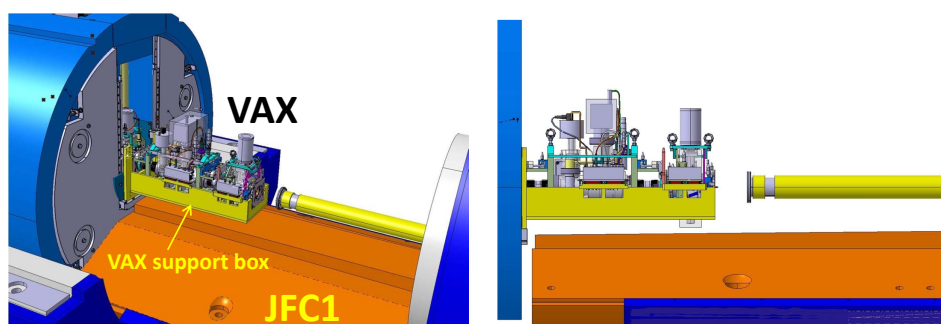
Drawing of the VAX equipment that will be installed in ATLAS prior to LHC run 4.
